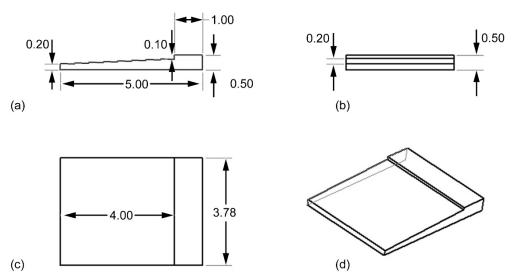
Thick generic fan blade fragment. Dimensions in inches. (a) Side view. (b) Front view. (c) Top view. (d) View of model.
